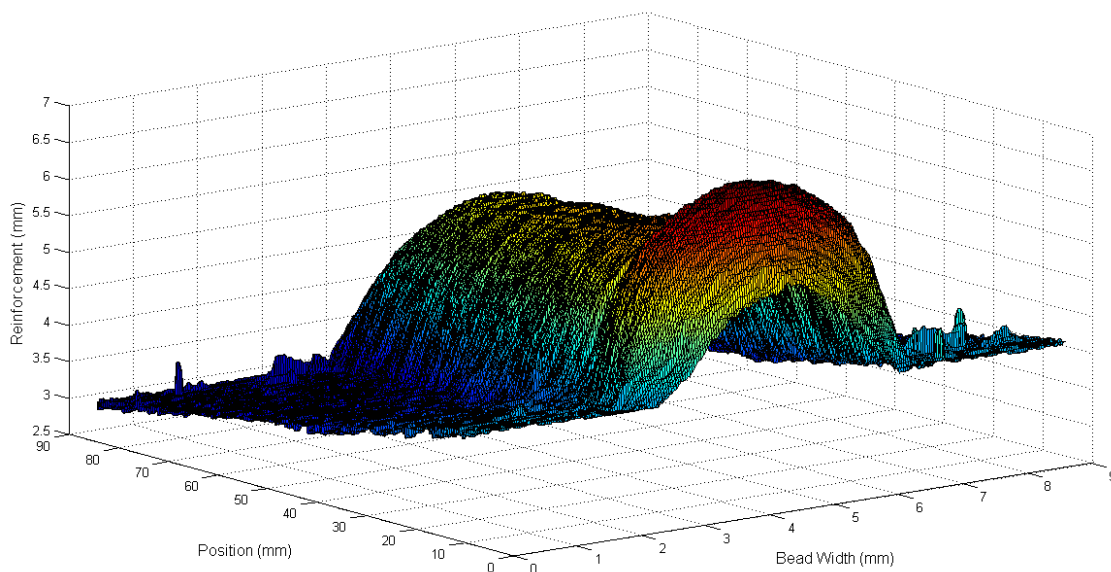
Three-dimensional reconstruction of the weld bead obtained with the low-cost laser scanner in the experiment 3.
